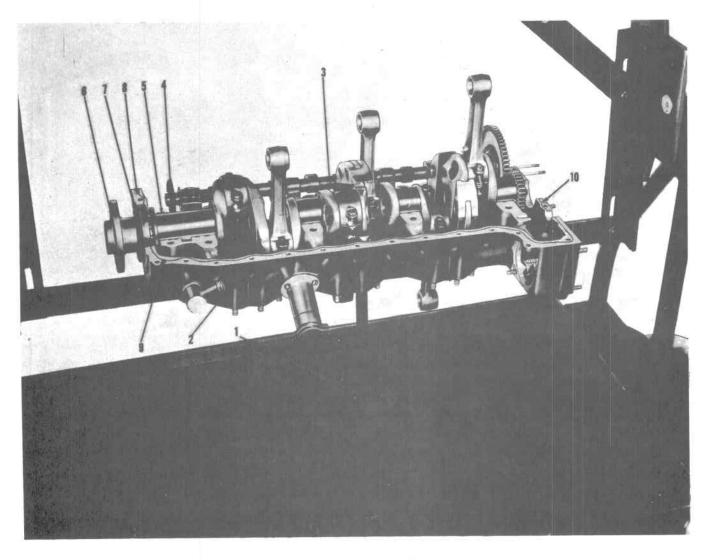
B. LEFT CRANKCASE AND SHAFTS SUPPORTED FOR DISMANTLING OR FINAL ASSEMBLY.
